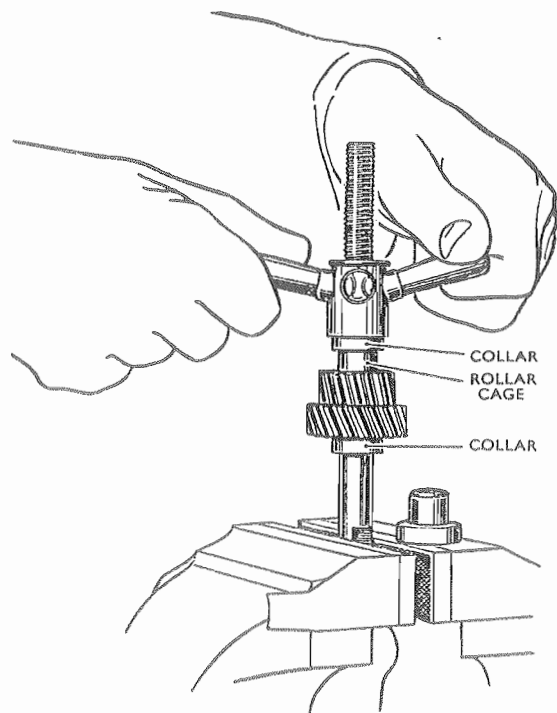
FITTING SECOND DRAWN CUP NEEDLE BEARING
